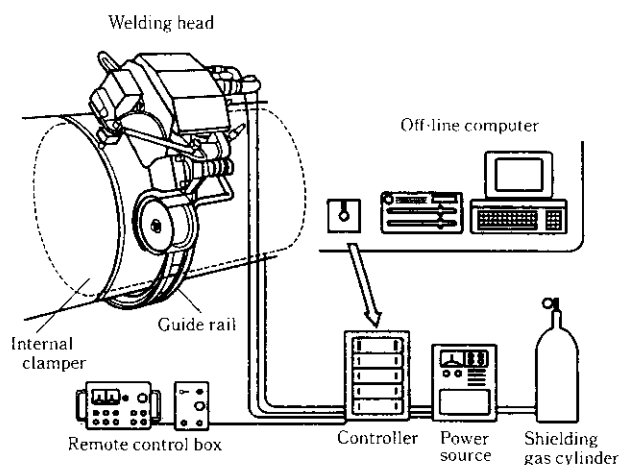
Computer-controlled circumferential MAG welding system
